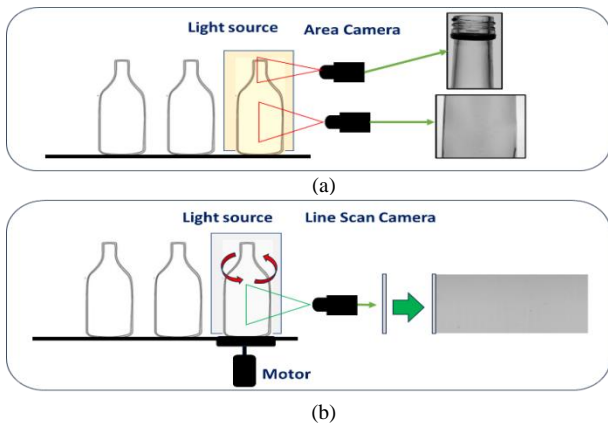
Inspection machine (a) Straight glass bottle inspection machine (b) Rotating glass bottle inspection machine.
